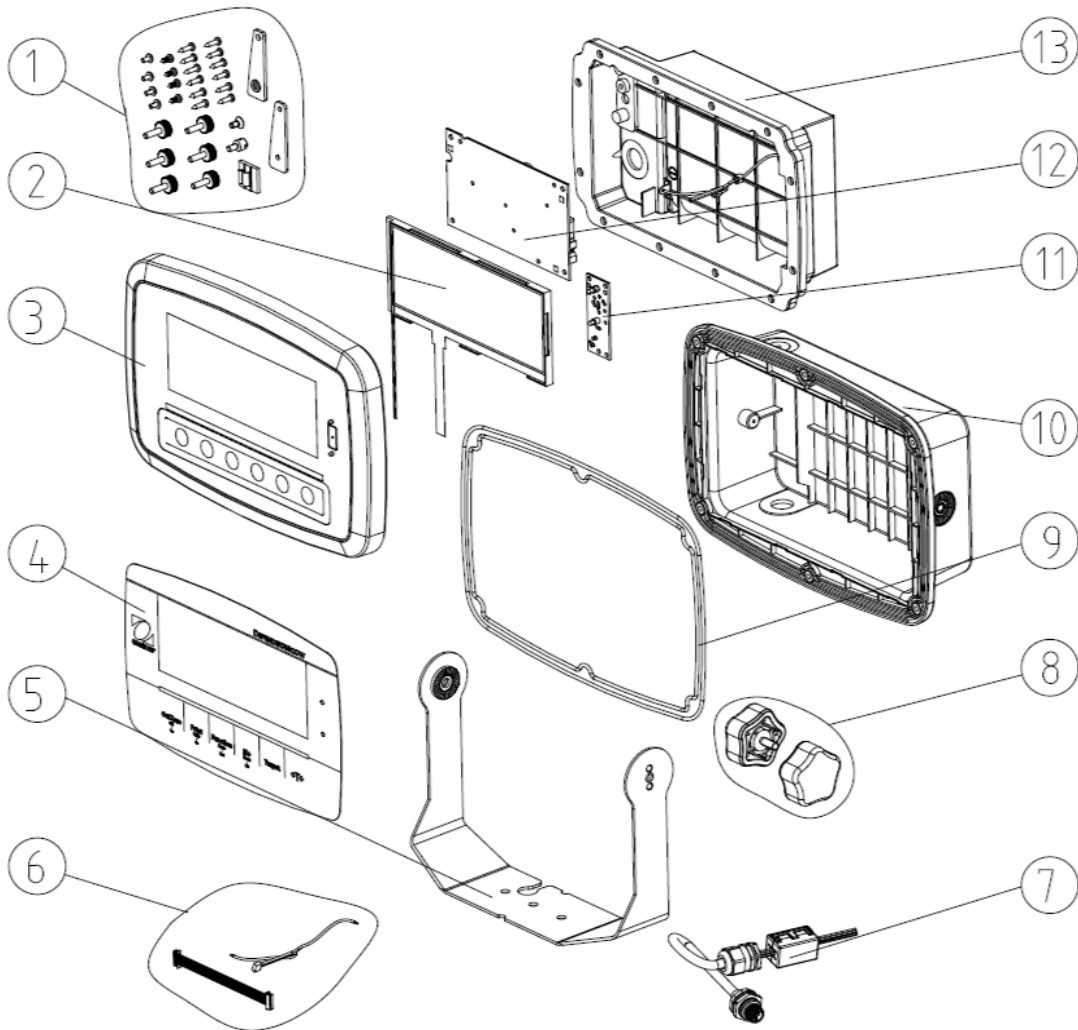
Defender 6000 series Indicator: i-DT61PW
